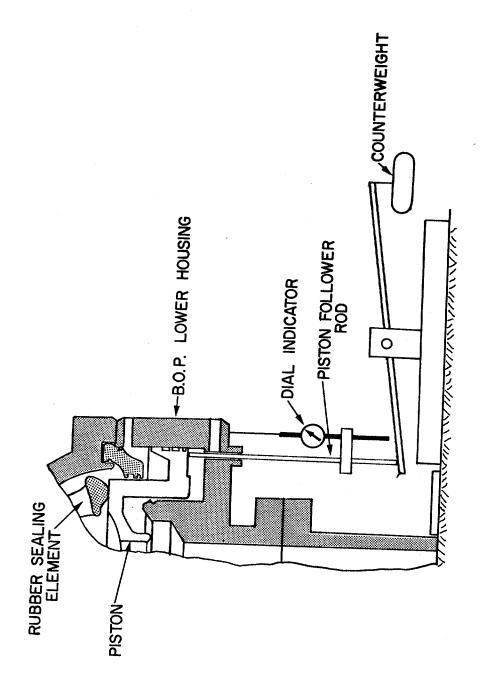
PISTON POSITION INDICATOR ASSEMBLY
